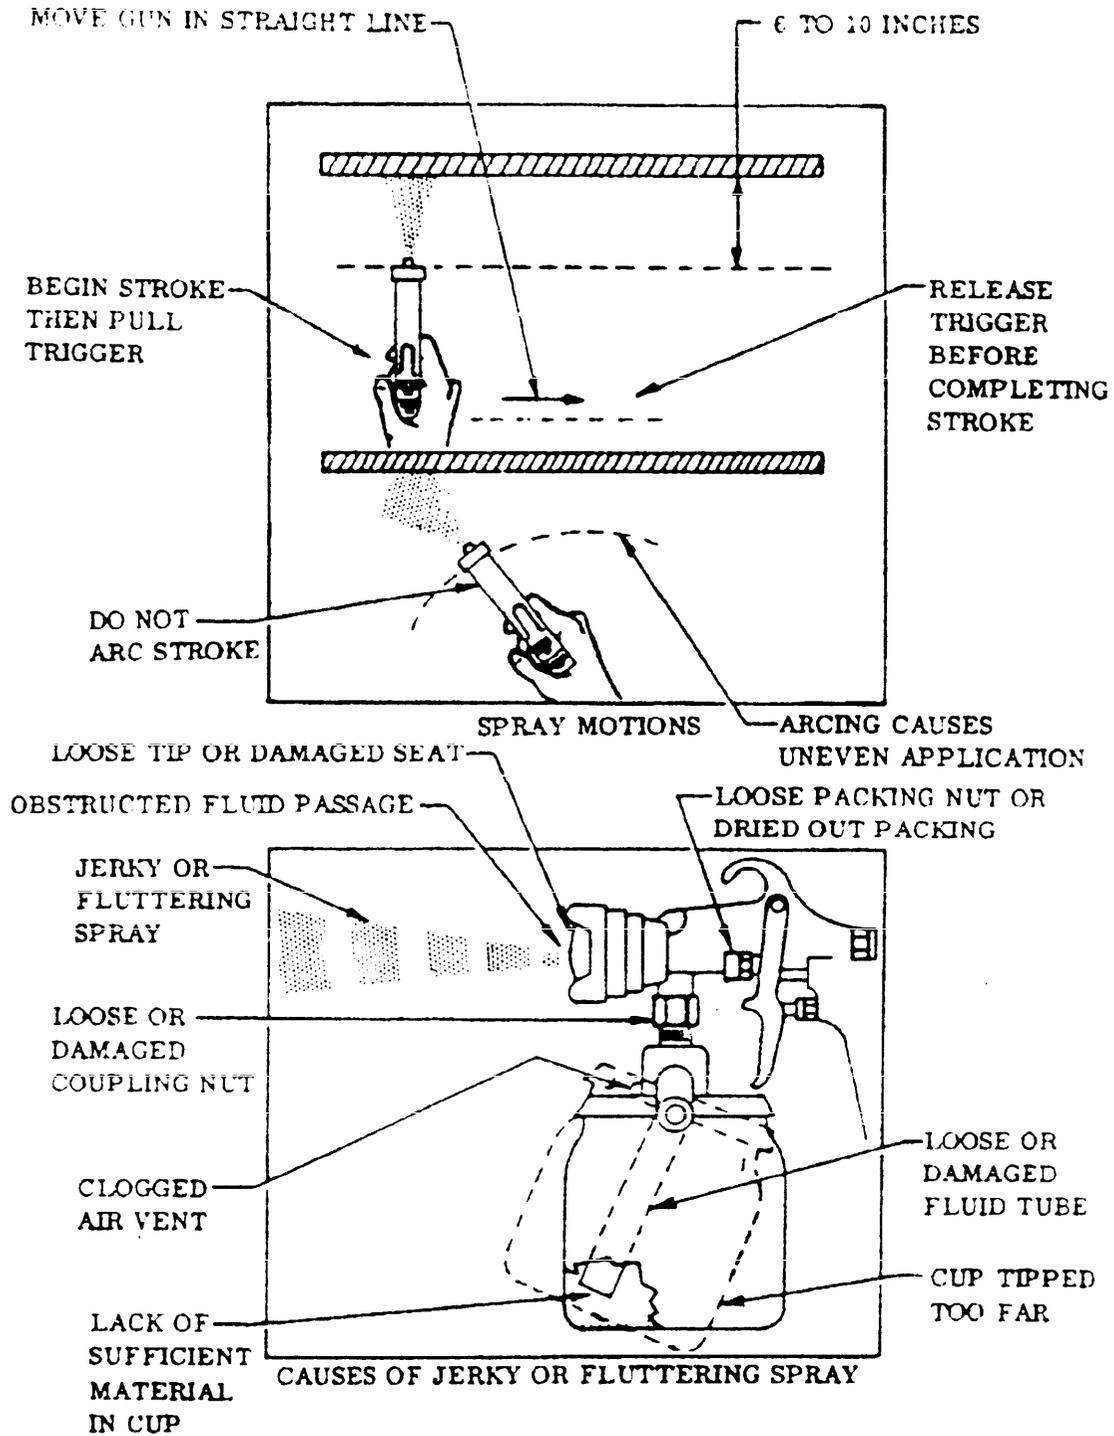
(Sheet 2 of 2). Spray painting technique
